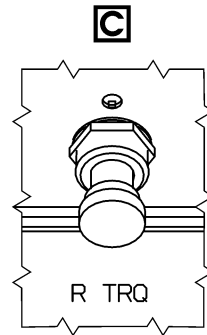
Torque Transmitter - Removal/Installation (Sheet 1 of 2)
